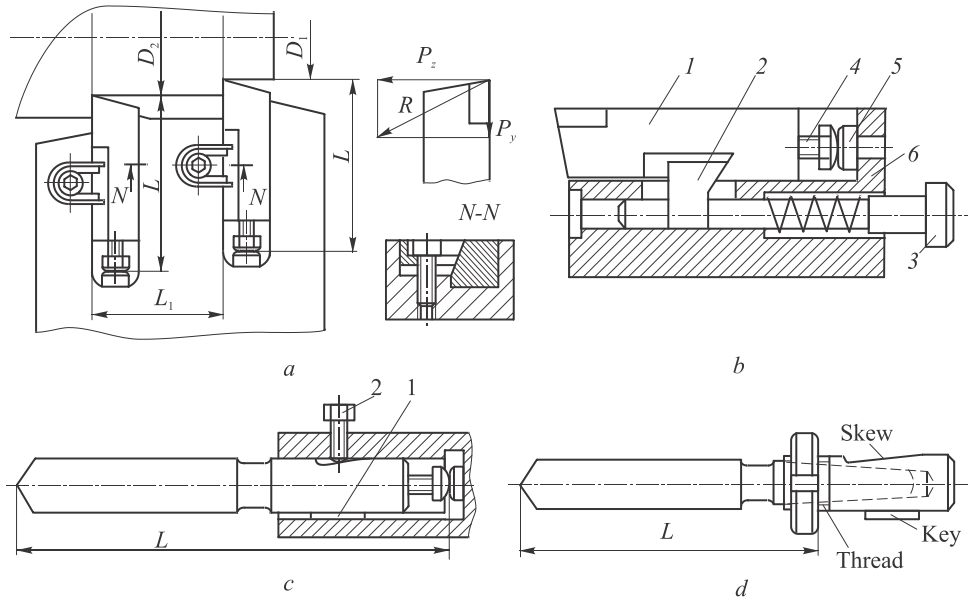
Designs for adjustment-free tool change: (a), (b) for cutters; (c), (d) for axial cutting tools
